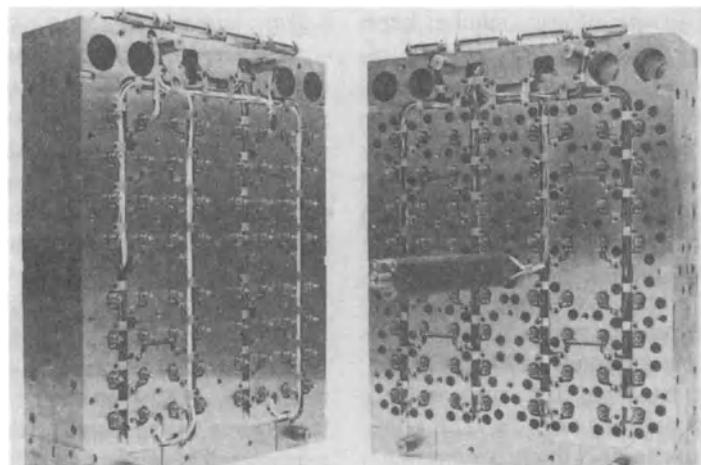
Husky 96-cavity hot-runner mold manufactured via CAD/CAM/CAE and used in a stacked mold system.
